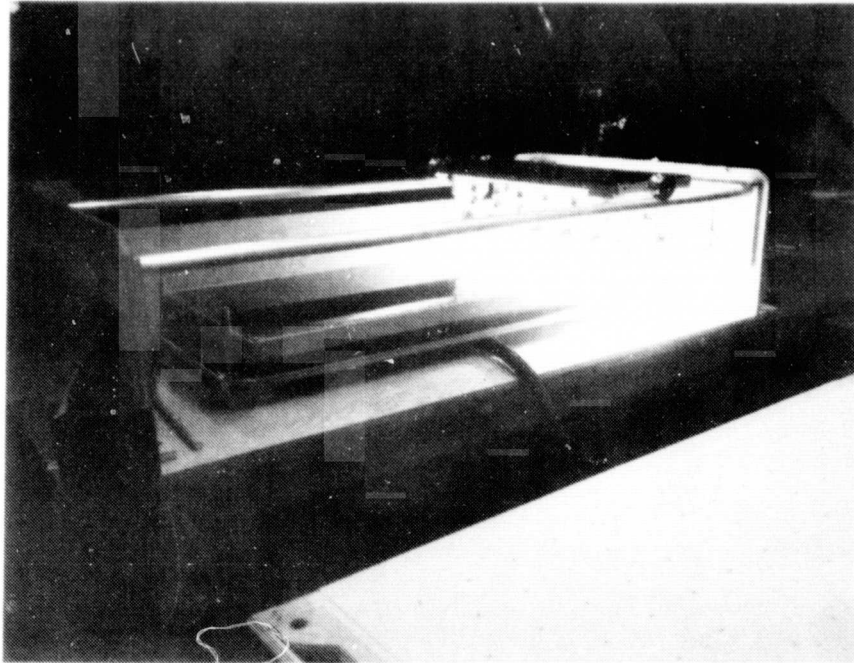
Radiant-heat mass reflow soldering assembly during processing.
